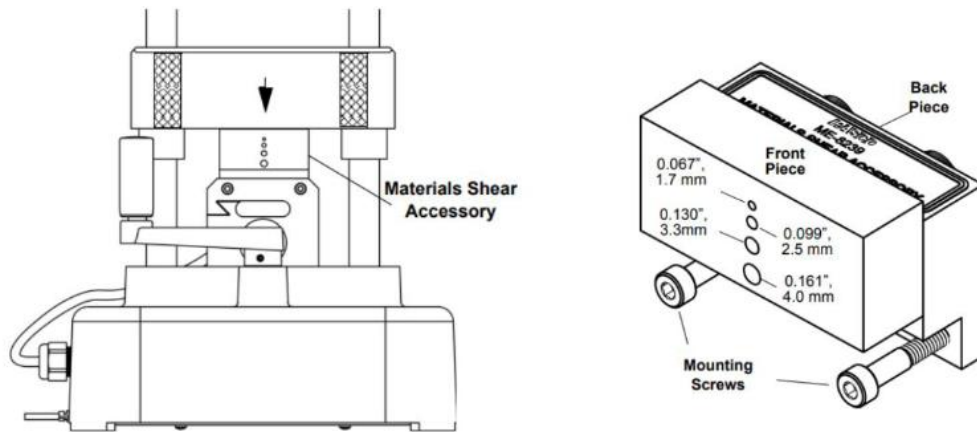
Machined metal blocks used for shear testing. The shear fixture allows for the adaptation of the load frame to measure shear strength.
